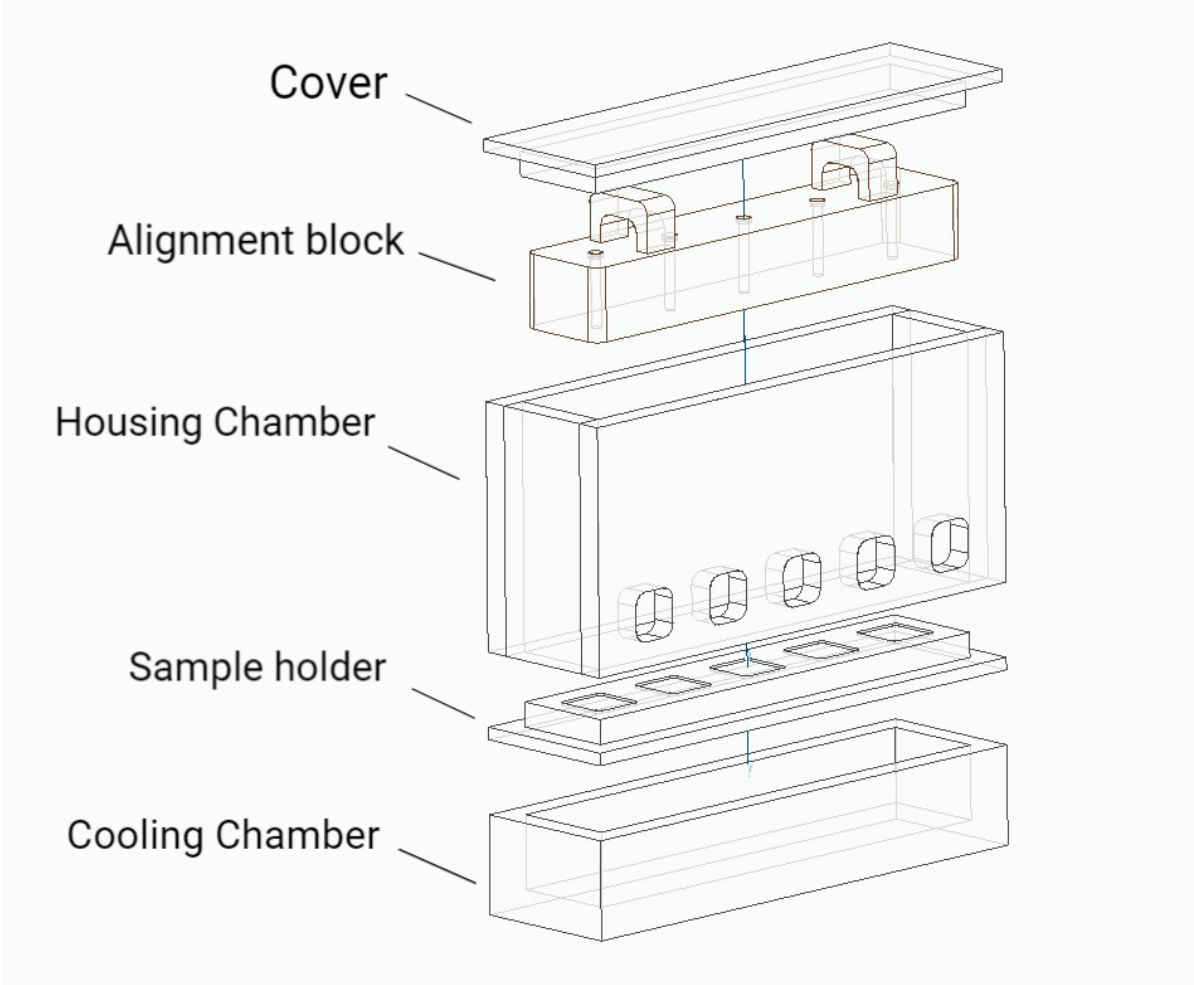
Exploded assembly of custom designed housing components and alignment block.
